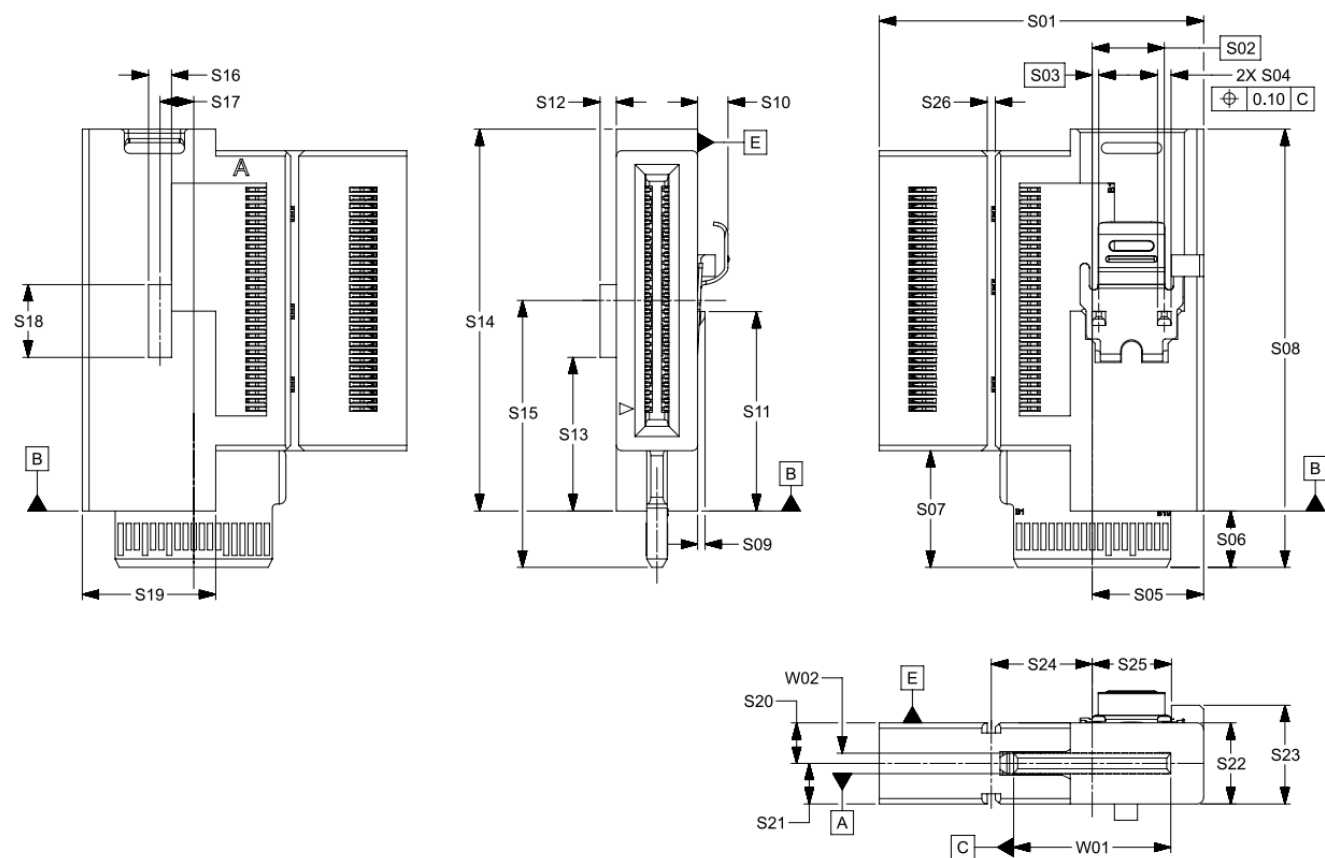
Dimensions of 38-Pin Style B Connector Plug E3-1C
